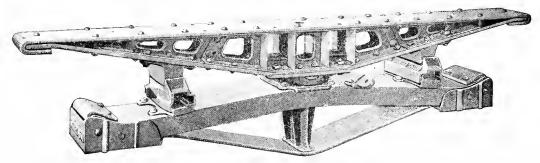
Simplex Body Bolster with Cast Steel Web Filler, in Position on Simplex Truck Bolster with Susemihl Roller Side Bearings. Simplex Railway Appliance Company.
